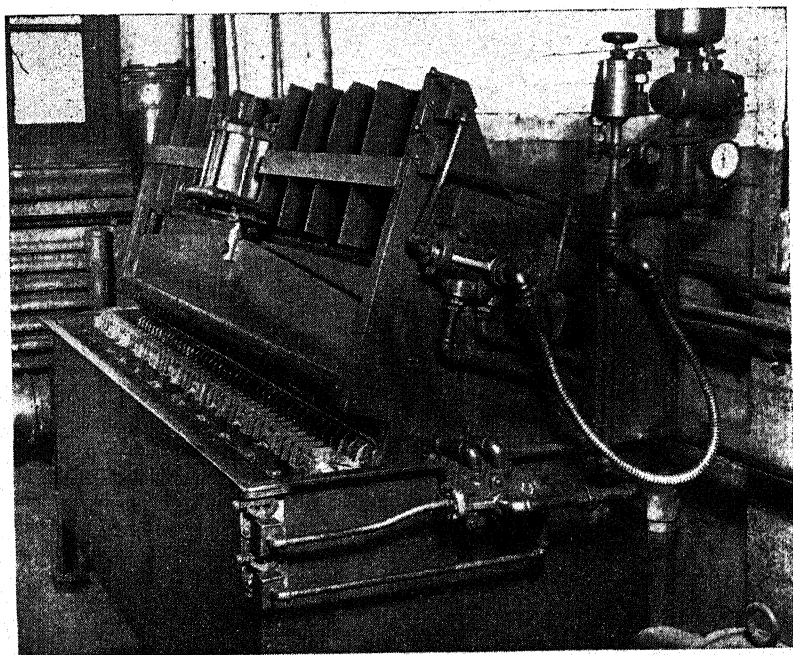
Arc welded fixture for hardening long steel strips.
